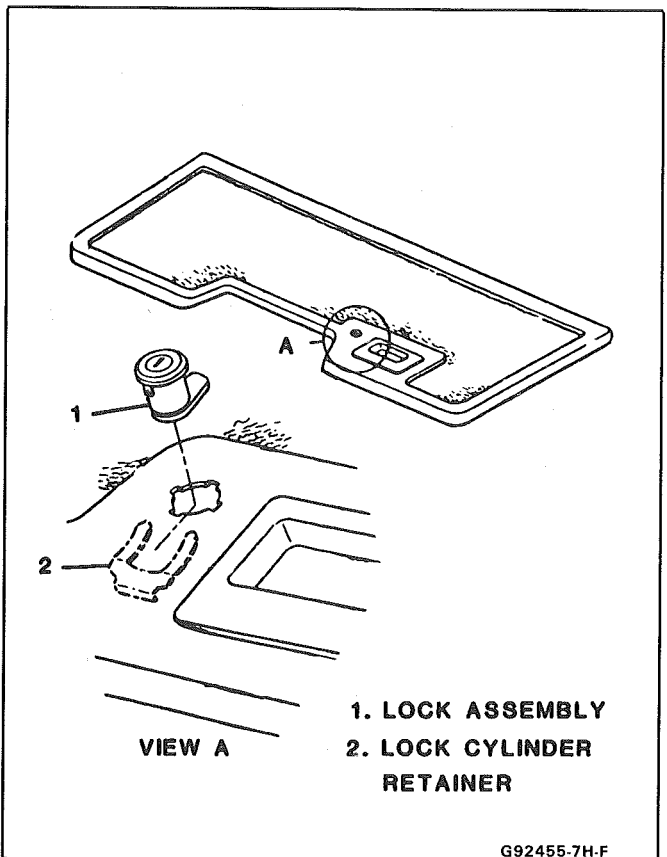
Load Floor Storage Compartment Lock Cylinder
